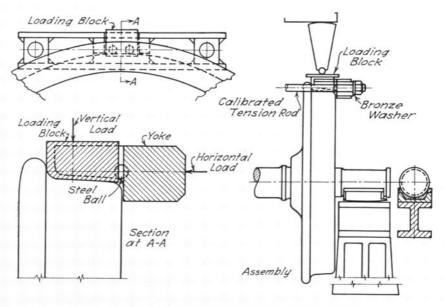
LOADING BLOCK FOR TRANSMITTING VERTICAL AND HORIZONTAL LOADS TO WHEEL
